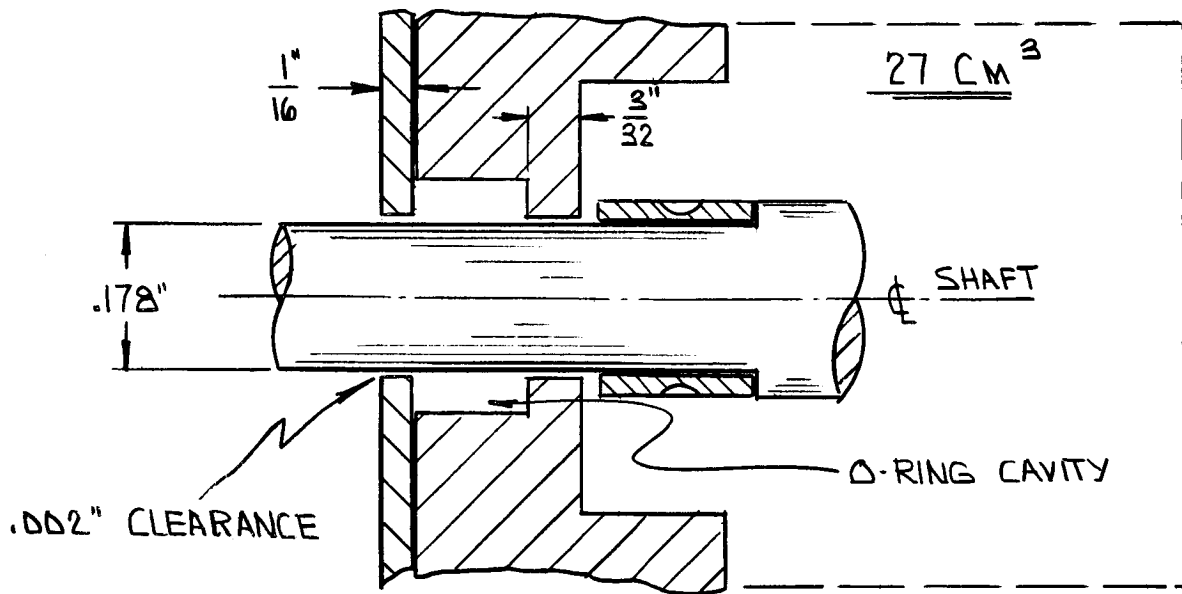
B - CROSS SECTION - SHAFT SEAL
